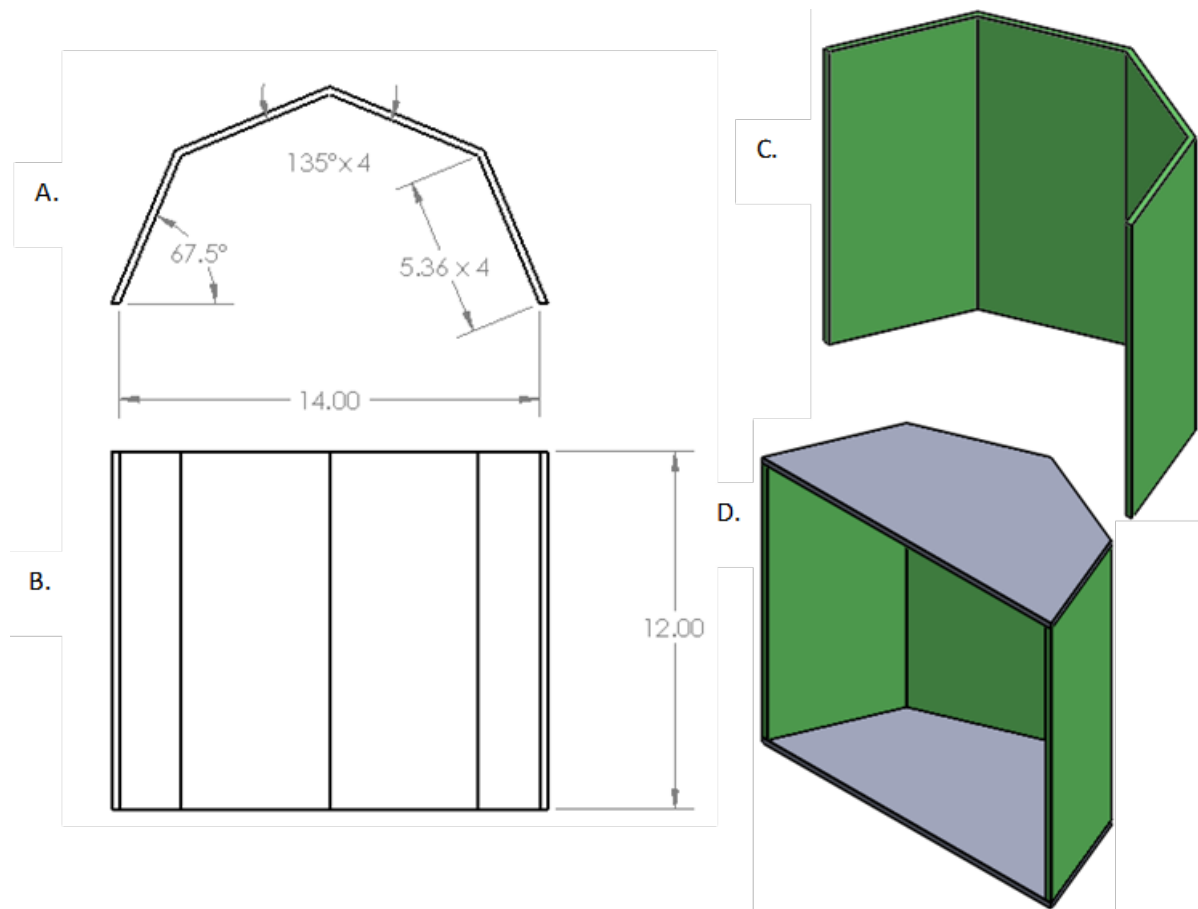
Cavity receiver dimensions. (A) Top view. (B) Front view. (C) Isometric view. (D) Isometric view with passive panels.
